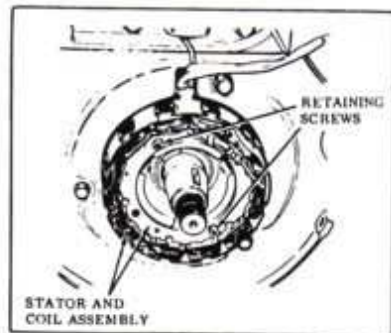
Ignition generator coil and stator serviced only as an assembly.
